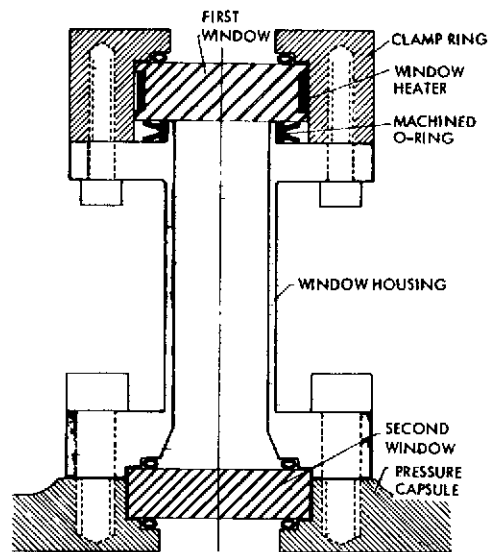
A-16. Tubular Window Assembly with Two Clamping Seals
